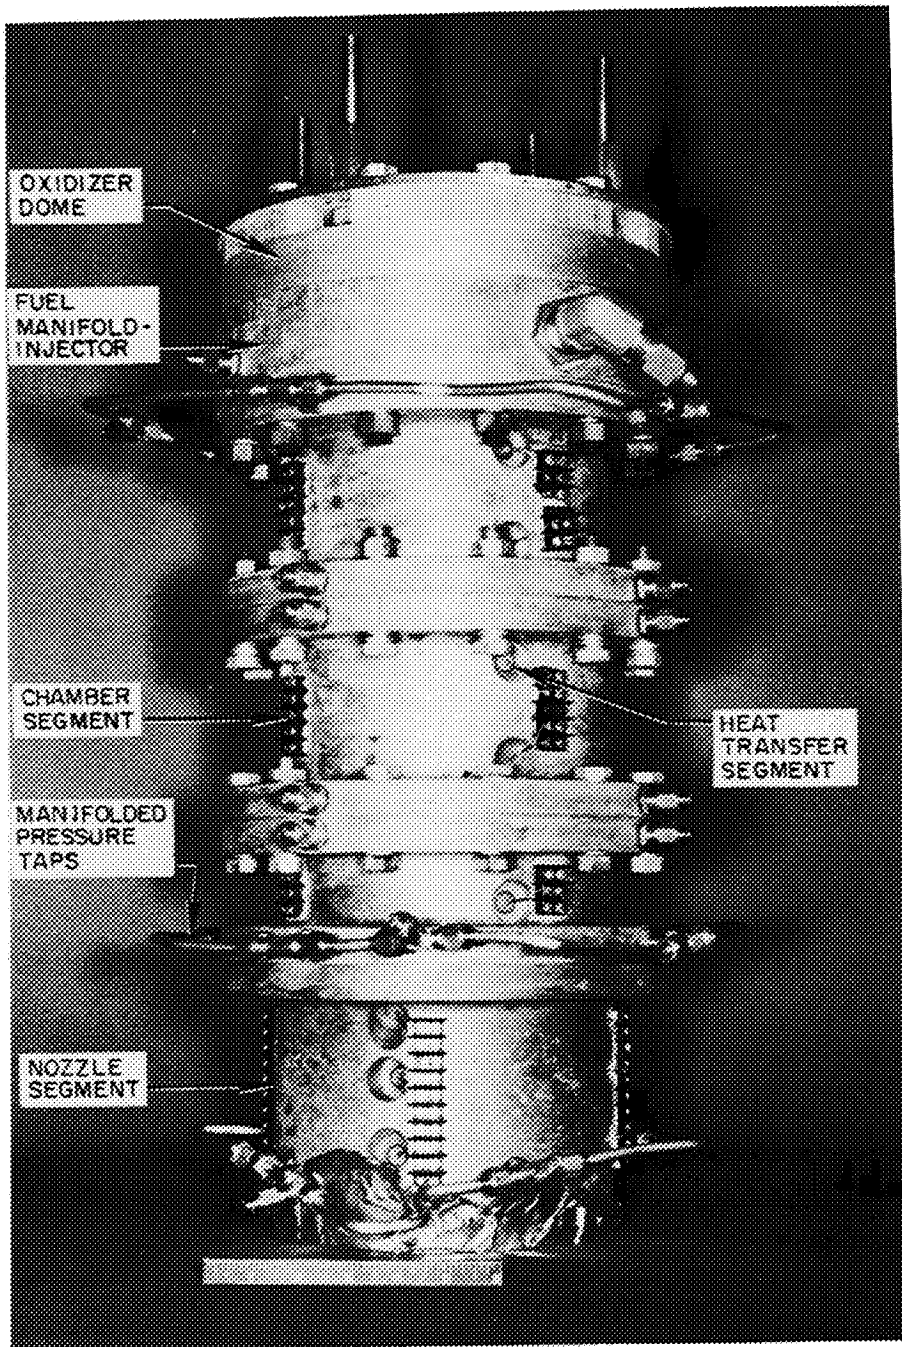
View of Assembled Thrust Chamber, Showing Segmented Construction and Method of Joining.
